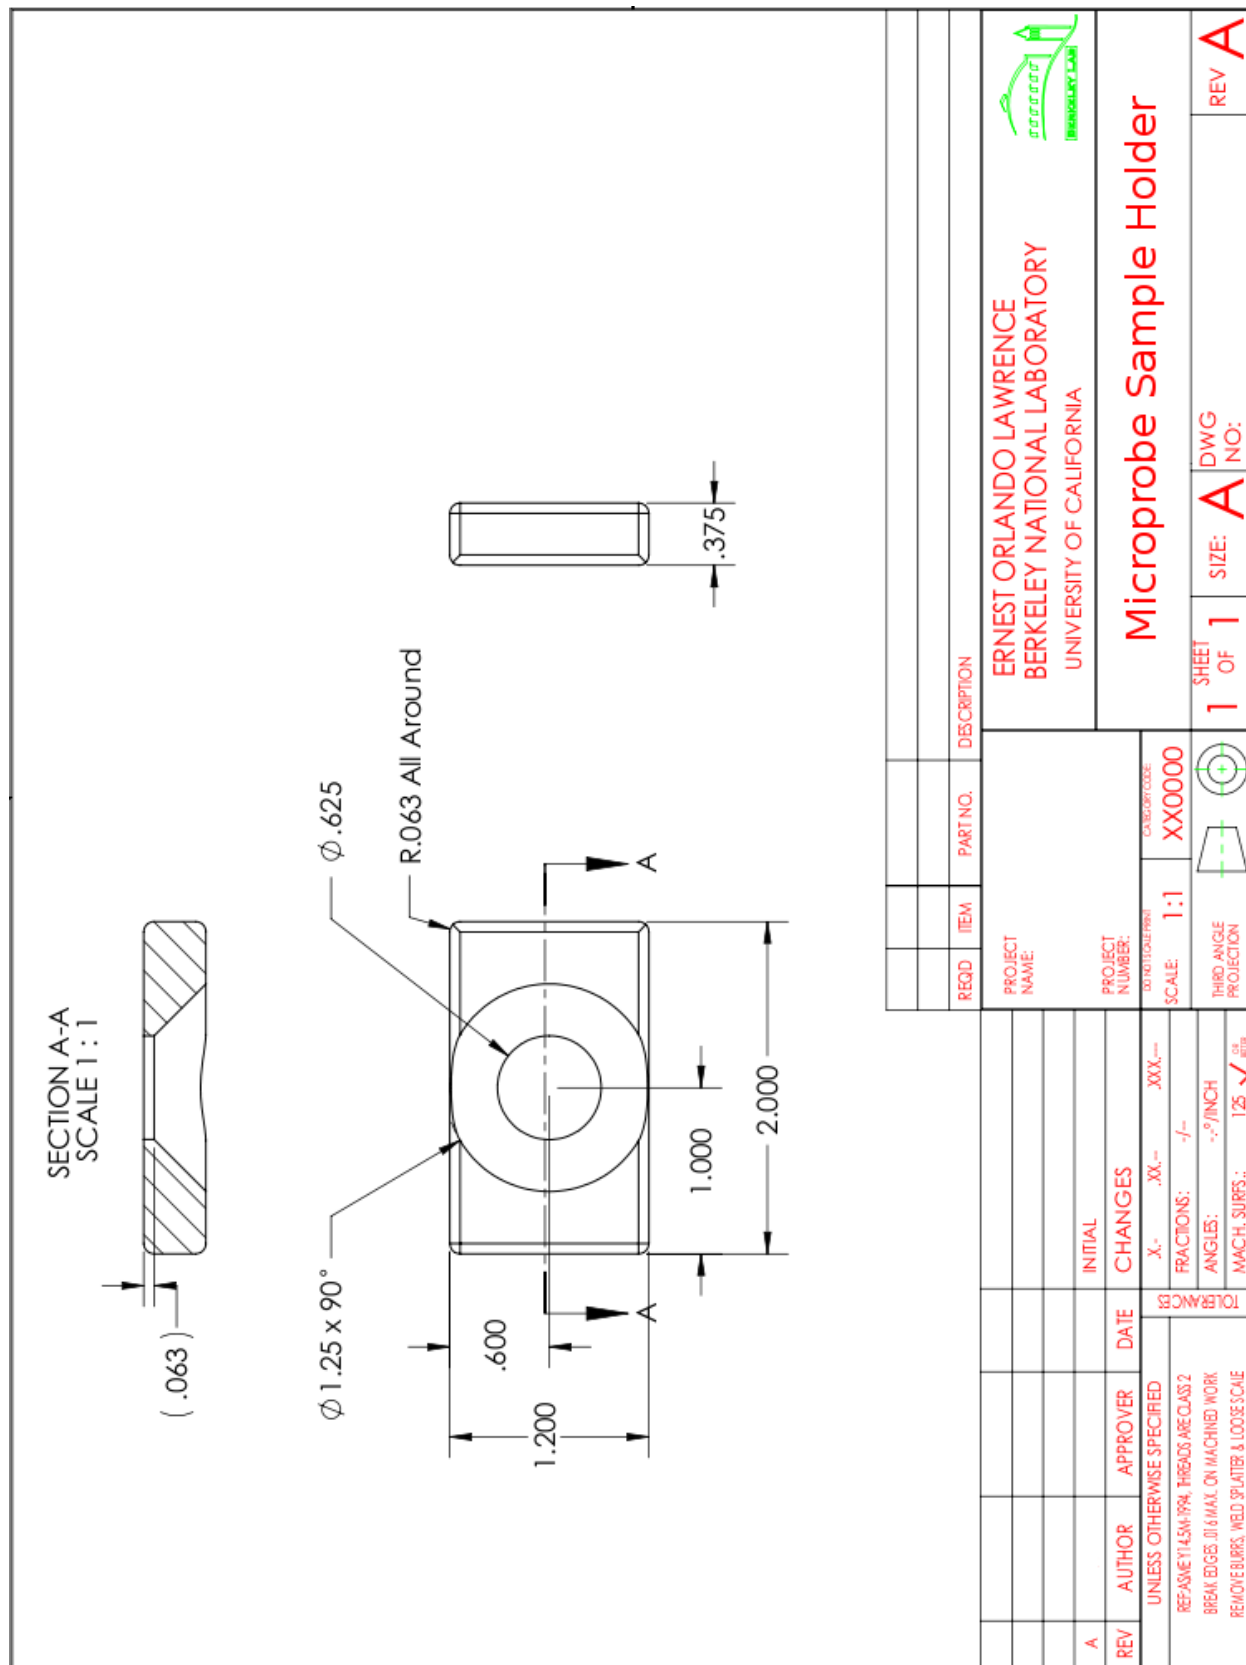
Manufacturing drawing of the sample mount for transuranic μ -XAS samples.
